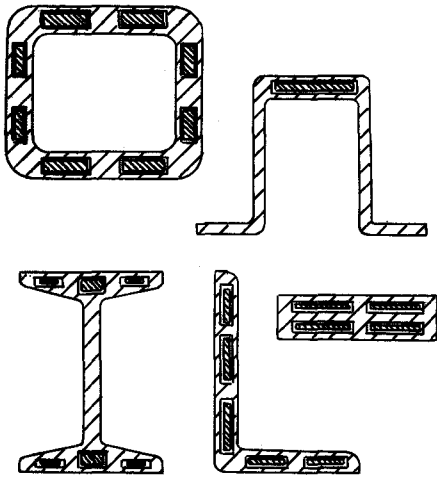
Cross-sections of cell-insert damped beam designs for common structural shapes (6)
